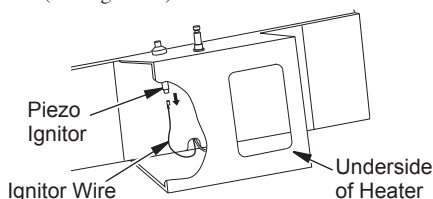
Removing Ignitor Wire from Piezo Ignitor
